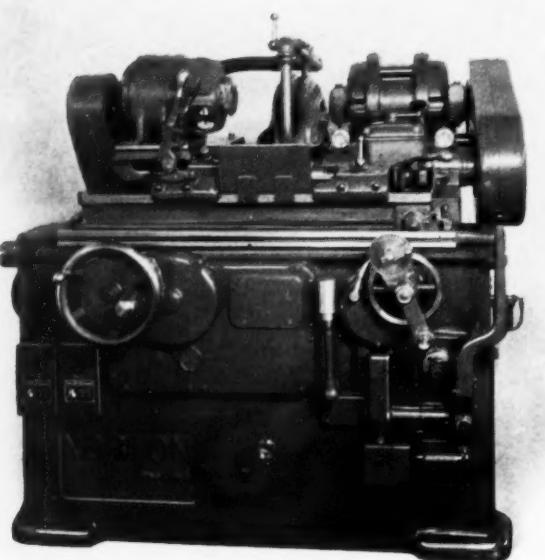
A 6-inch Plunge-cut Grinding Machine Hydraulically Actuated will be One of the New Machines in the Norton Exhibit
